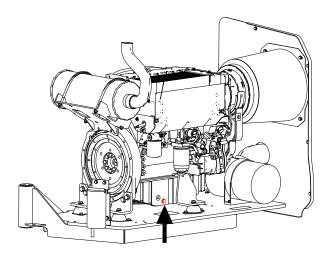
Deutz TD2011L04i engine oil drain valve
